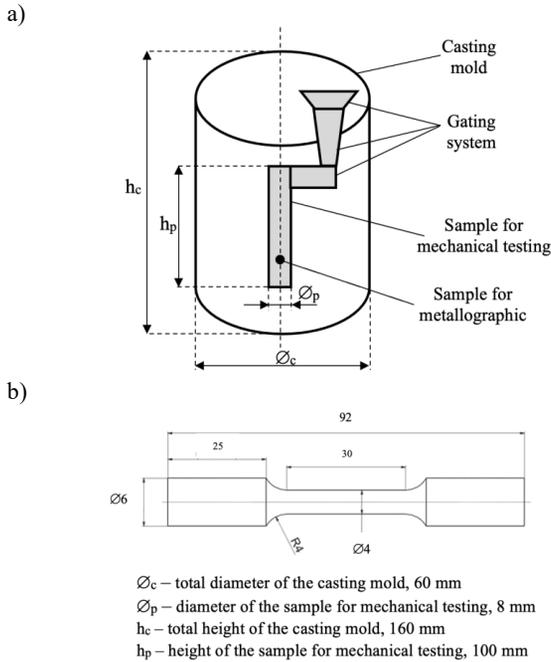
Casting mould: a) diagram; b) dimensions of the sample for mechanical testing (mm)
